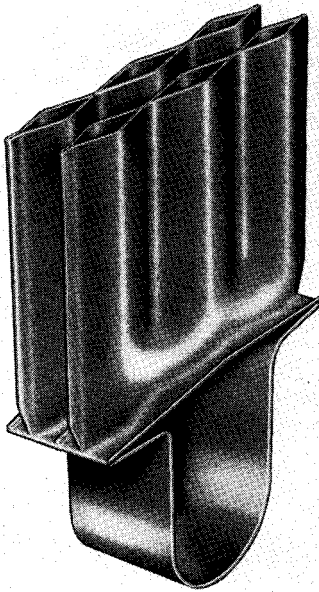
Radiator Section Showing Joints Formed With Outside Welds
